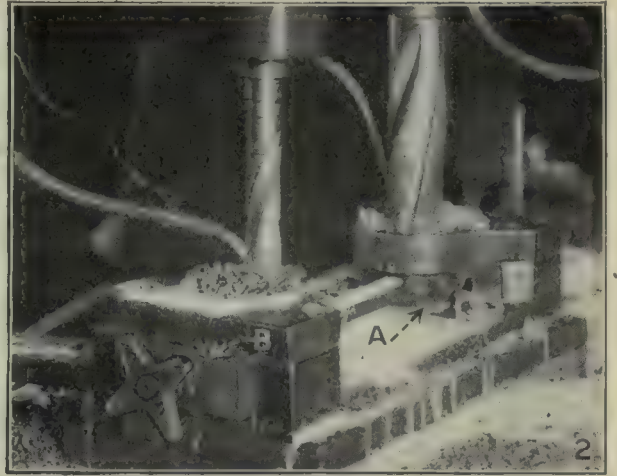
DRILLING BOTH ENDS OF THE ROD
